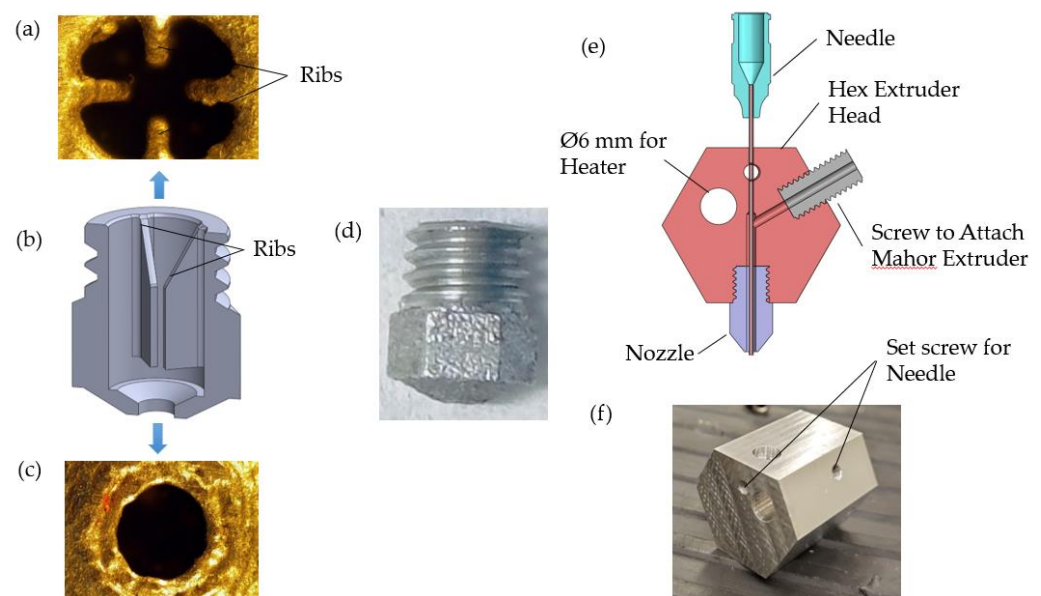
Extrusion nozzle: (a) Microscopic observation from top; (b) Cross-section of nozzles; (c) Microscopic observation from bottom; (d) Three-dimensional printed nozzle; (e) Transverse section view of Hot-end assembly; (f) Manufactured extruder head.
